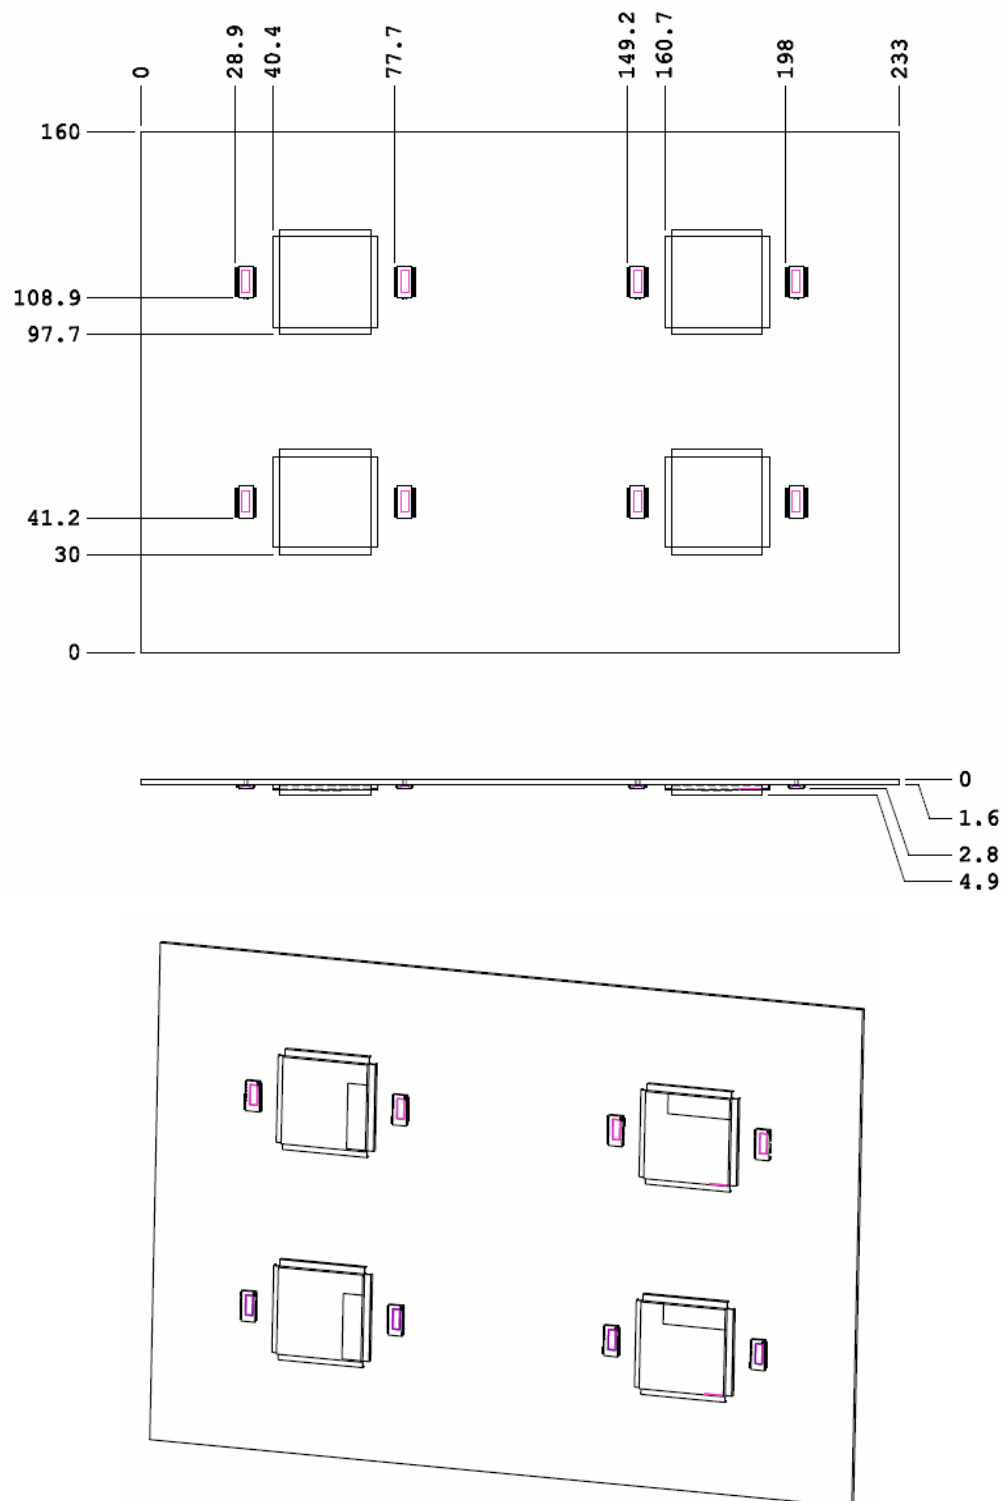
External dimensions of the PCB Assembly of the third case and location of the TPS54610 DC\DC converters and PQFPs on that PCB
